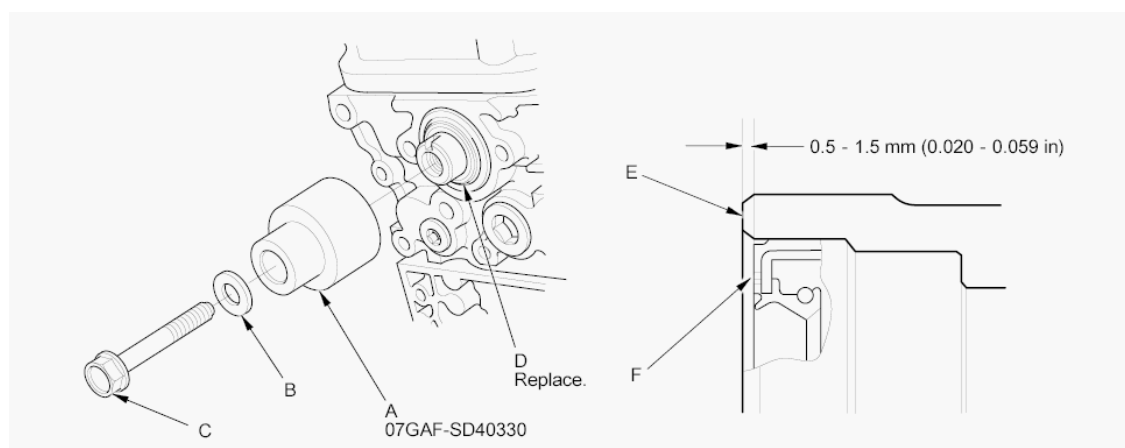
Installing Camshaft Oil Seal Using Ball Joint Remover/Installer
